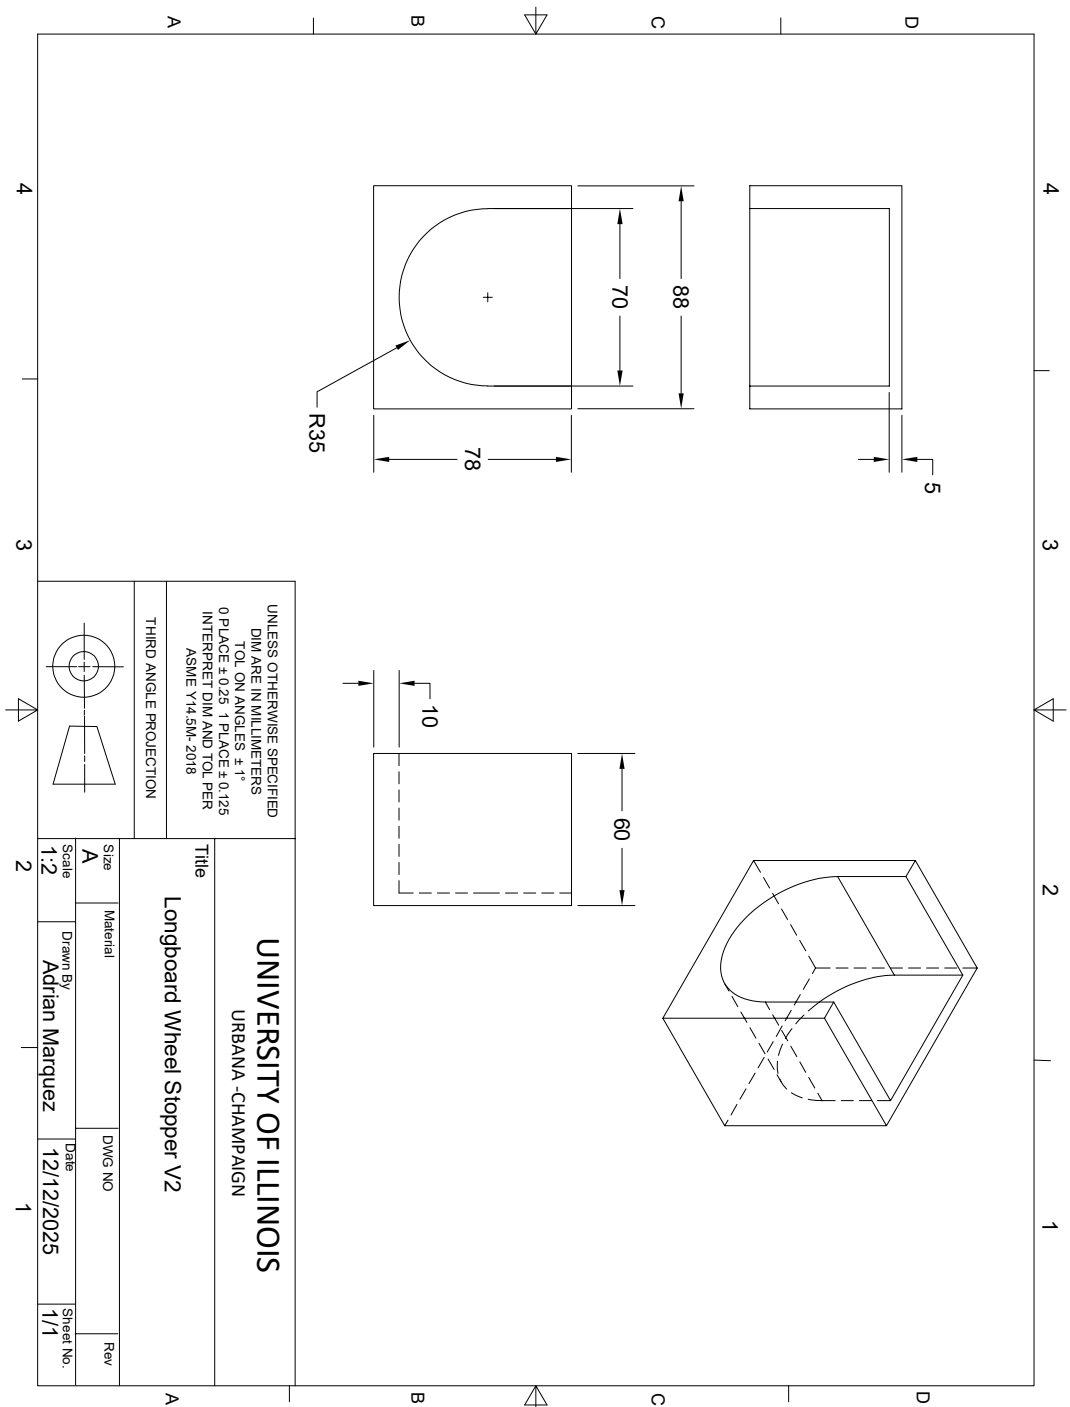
Solid Mechanics Demonstration: Skateboard Wheel Stopper Drawing
